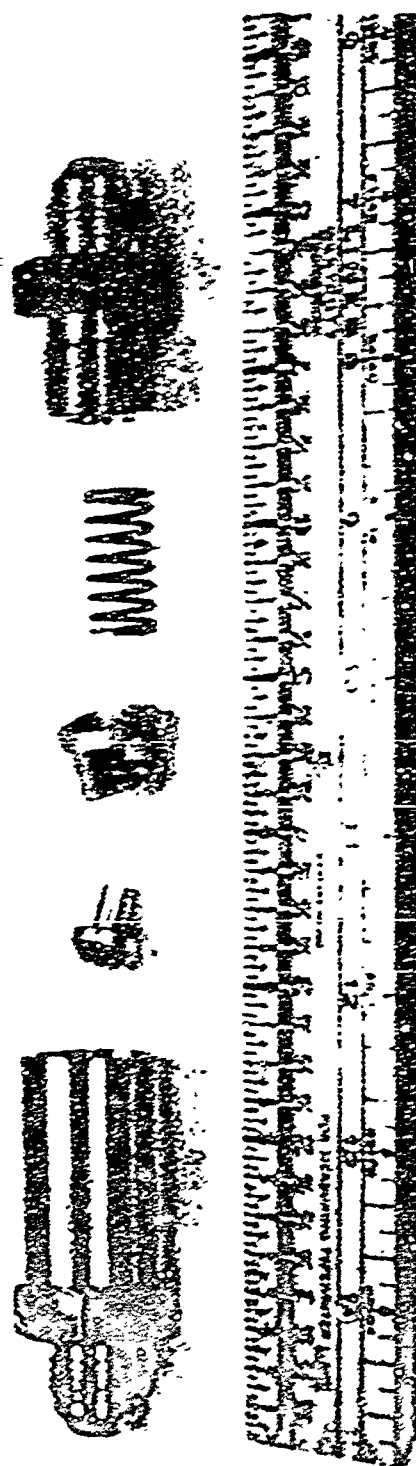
A CHECK VALVE EXPLODED VIEW, SEAL O.D. 1/2 INCH DIA.
